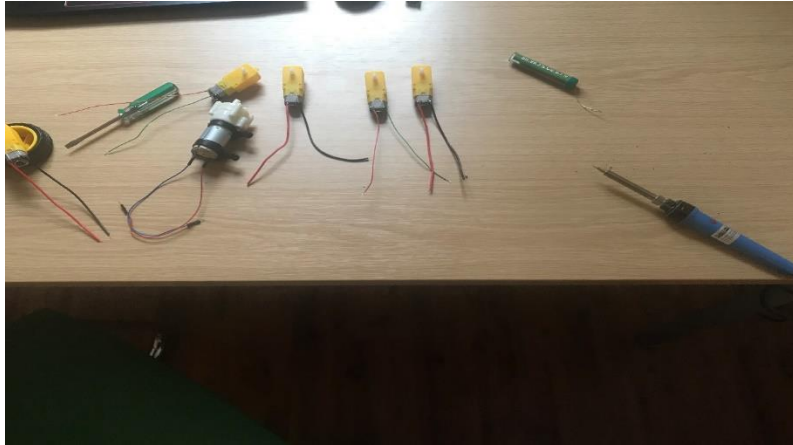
The photo shows the wires soldered to the geared motors and water pump.
